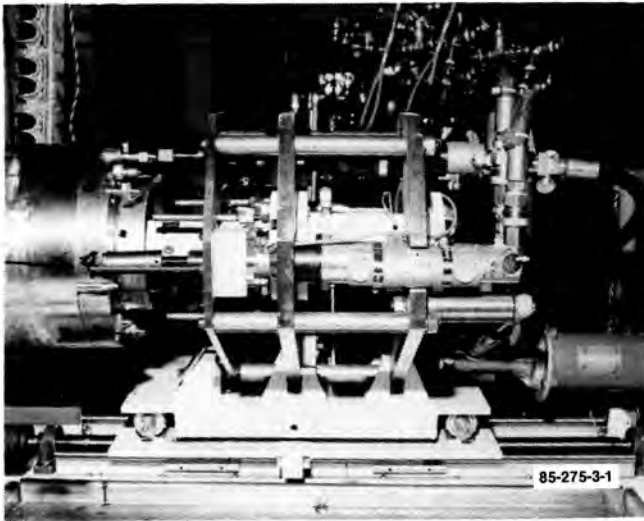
View showing Head Remover aligned with canister. Note nut runner socket positioned on head bolt.
